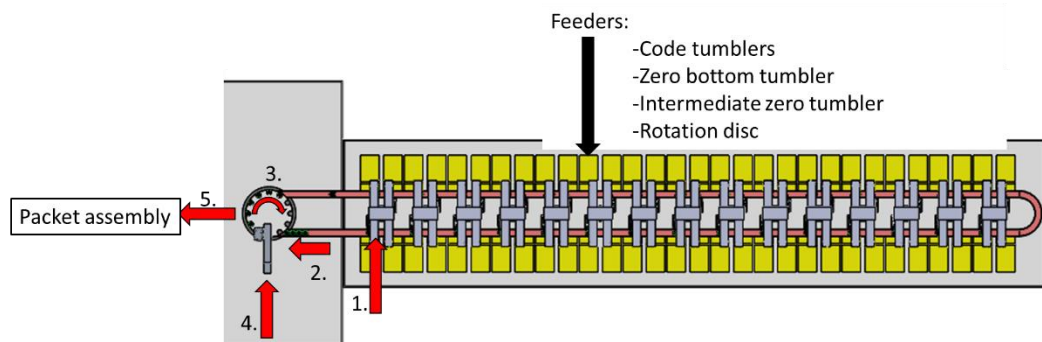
Puck feeding steps to picking parts and making them ready for assembly.
